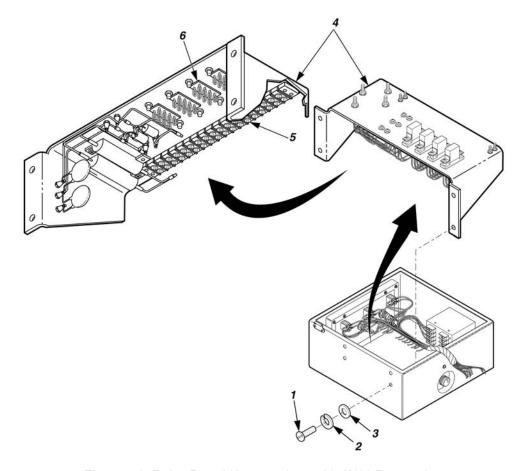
Relay Board Harness Assembly W11 Removal.
